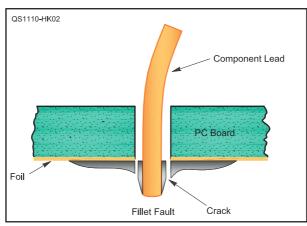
This diagram shows what can happen if too much force is applied to a solder joint. Hairline fractures occur in the solder, electrically separating the lead from the foil.
